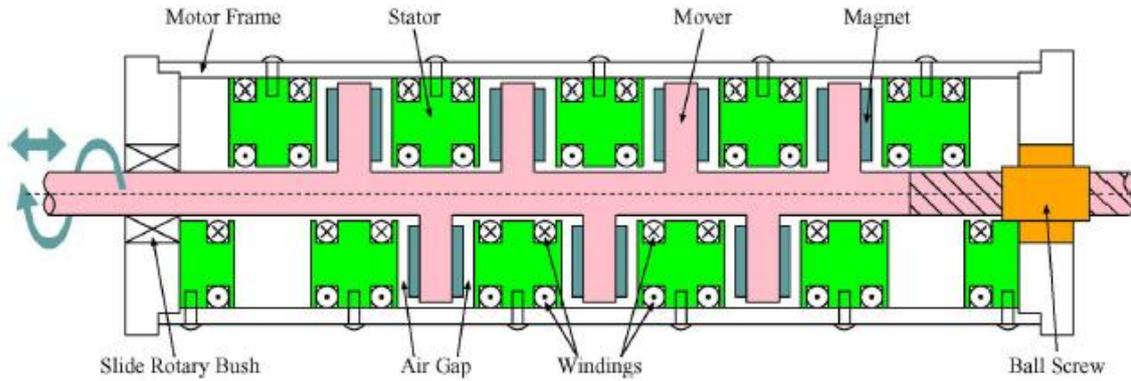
Spiral motor with ball screw to make air gap-control superfluous, [29]
